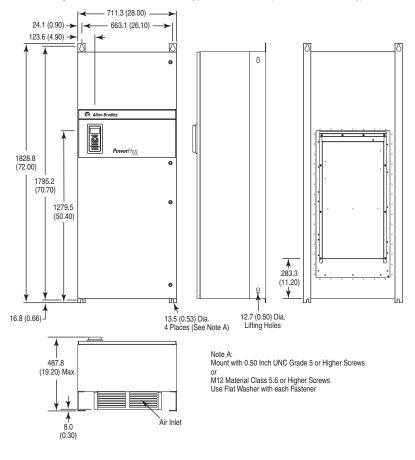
Frame 6 NEMA/UL Type 12 Standalone (400-690V drives only)
